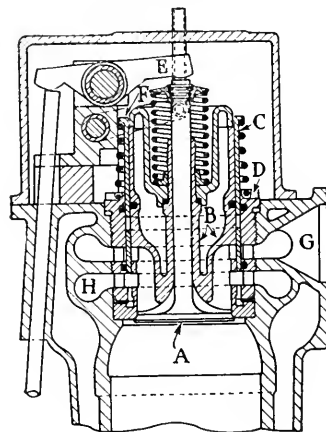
SECTIONAL VIEW OF STENGER COMBINED POPPET- AND SLEEVE-VALVE ENGINE
